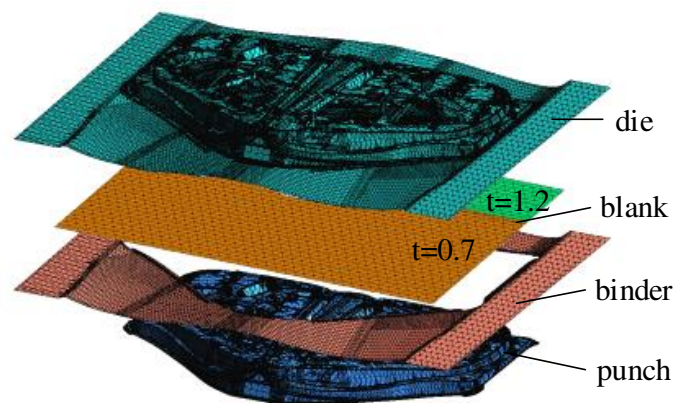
FE modelling of the drawing processes of the automobile rear door inner panel
